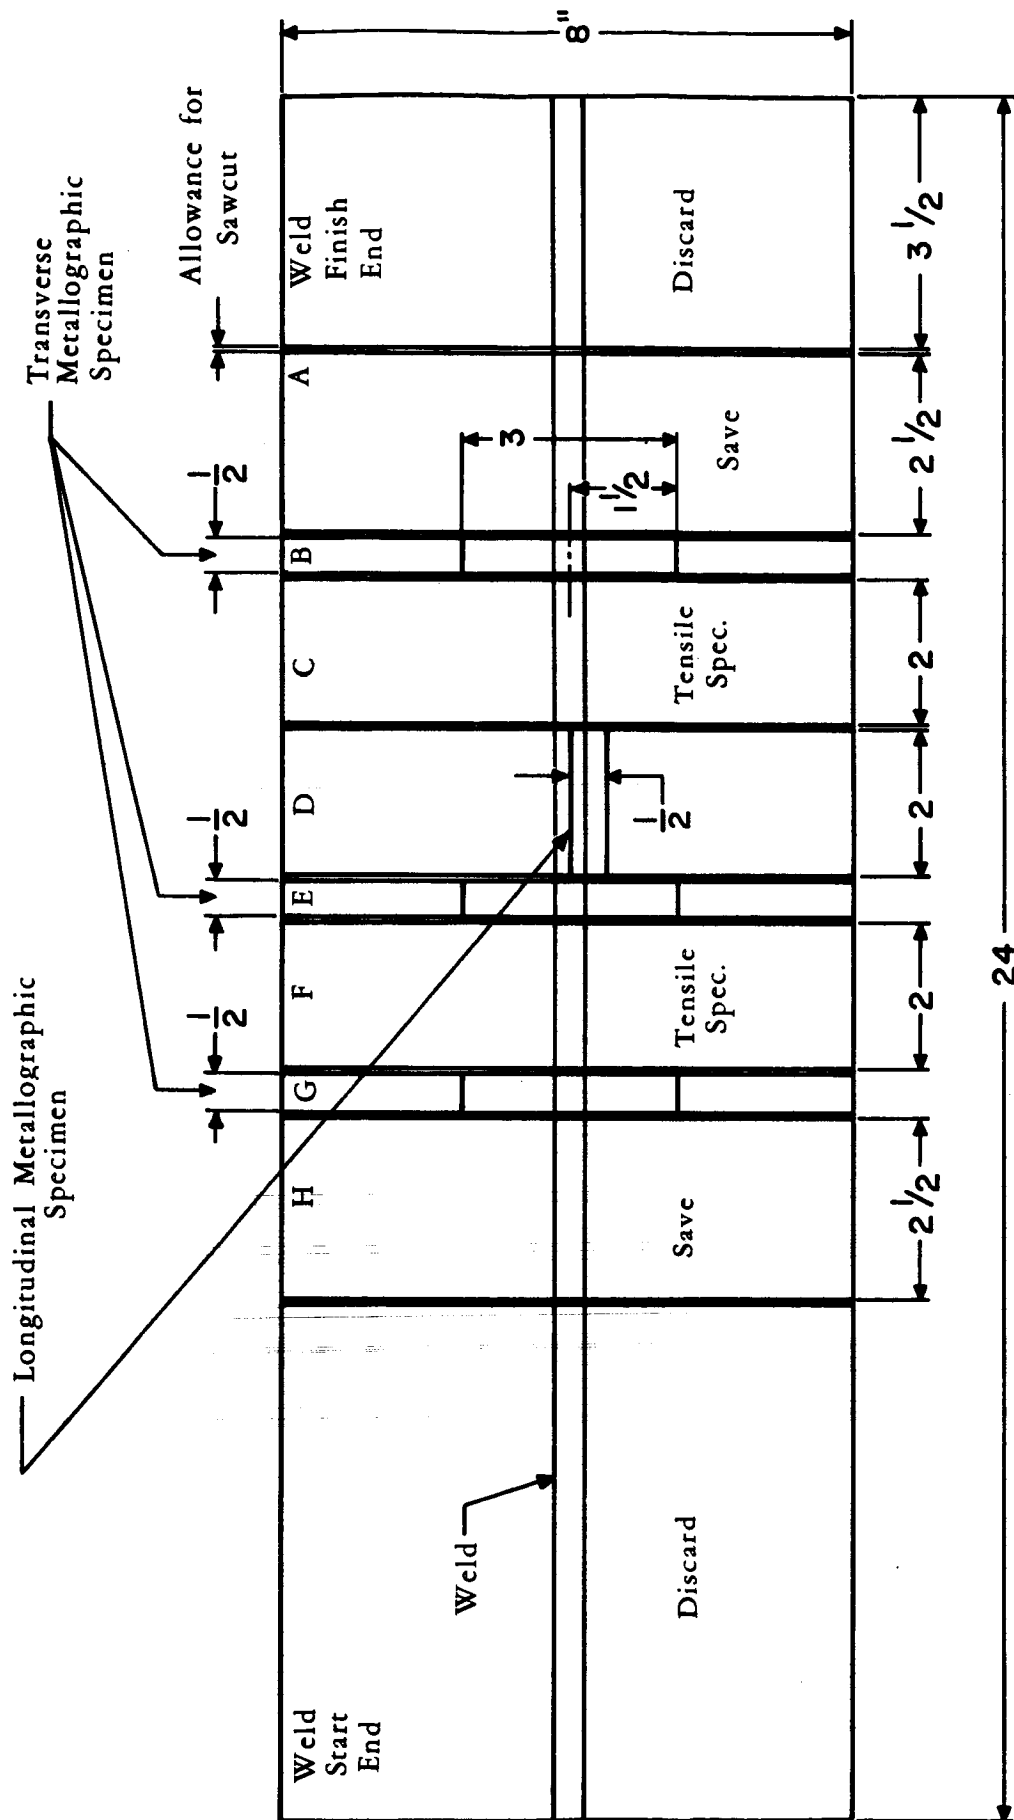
LOCATION of TEST SPECIMENS in WELDED PLATE (all dimensions in inches)
